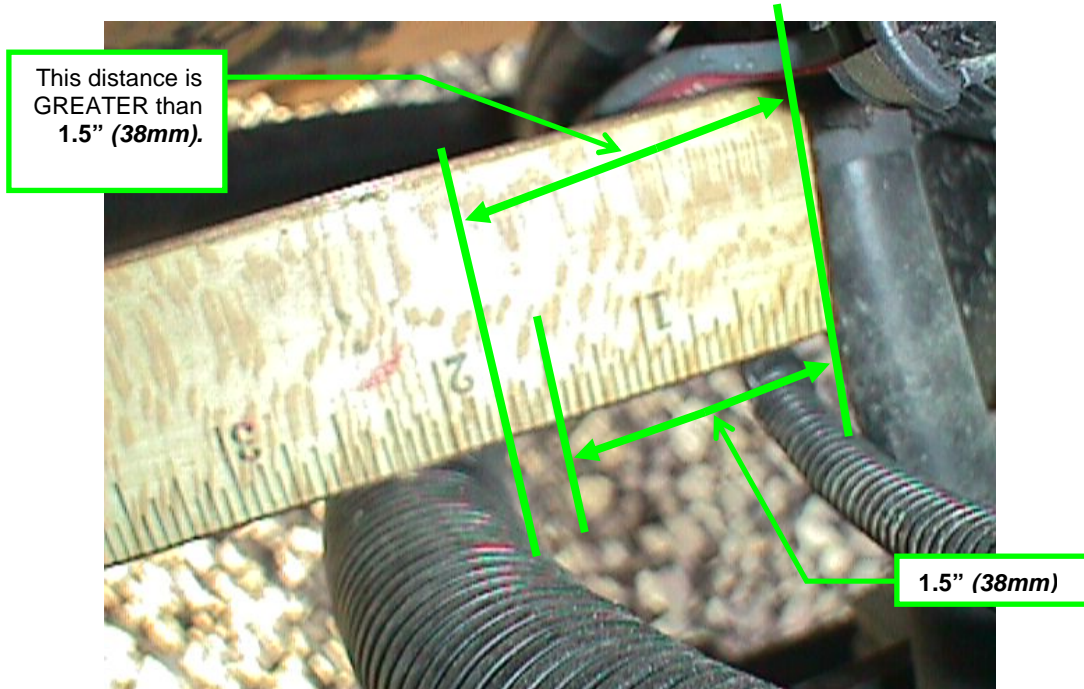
No Saddle Clamp Necessary – Skip to FINAL INSPECTION
